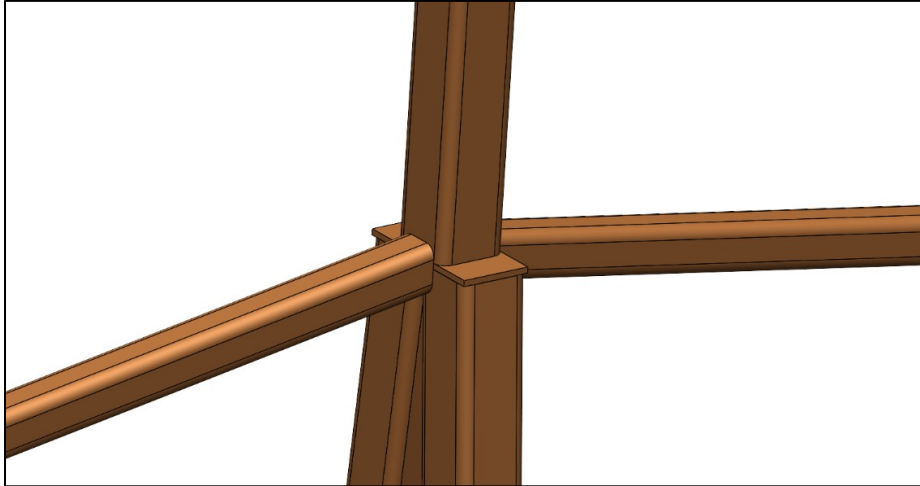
Outer Ring Welded Connection from Weldments Assembly
